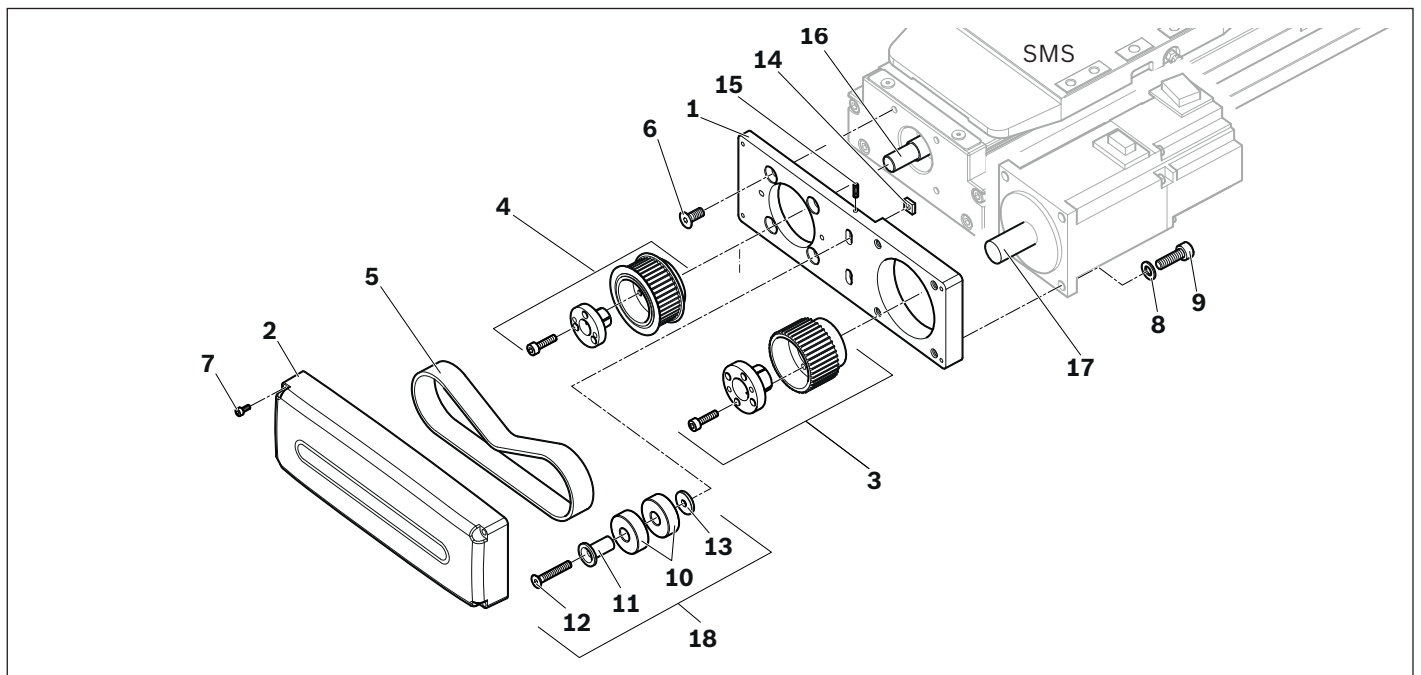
Mounting the SMS-080 / SMS-120 belt side drive
